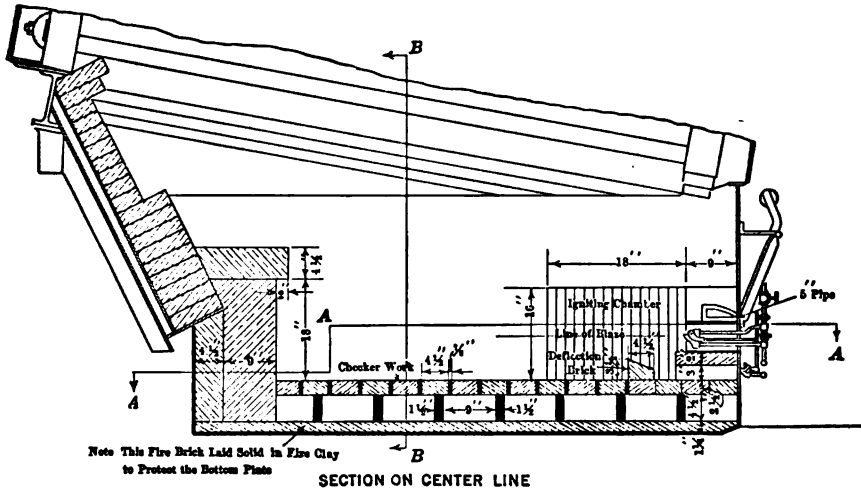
Babcock & Wilcox water-tube boiler—marine type.
